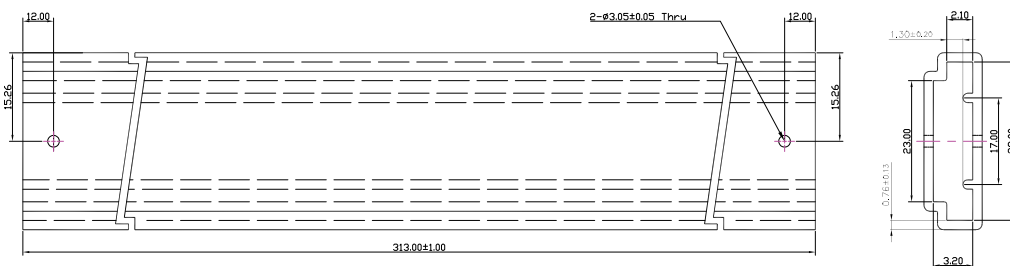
Tube dimensions for L2C5-xx001211E1900.
